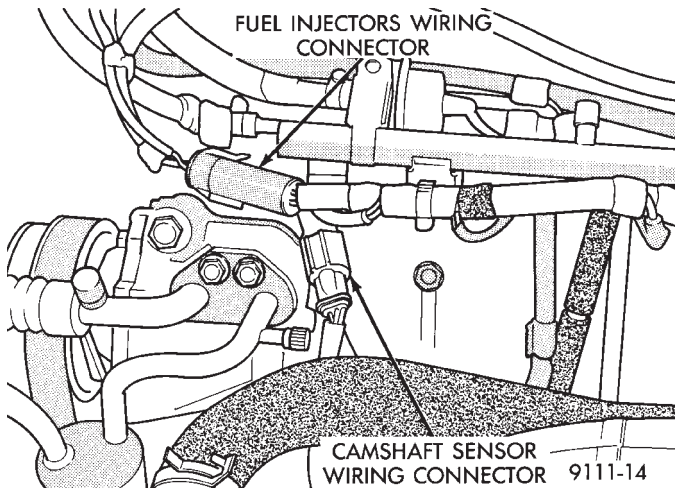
Camshaft Sensor and Fuel Injectors Wiring Connectors
